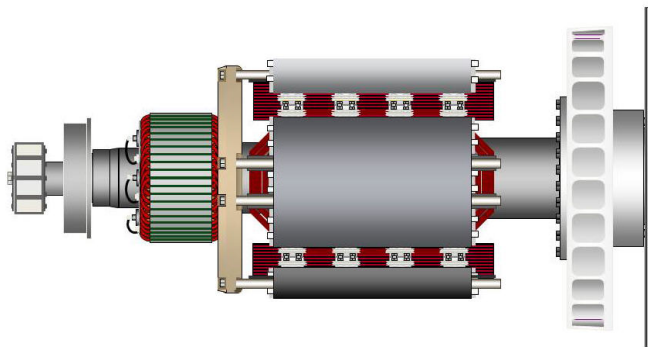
ONE BEARING ALTERNATOR ROTOR SHOWING COUPLING DISCS BOLTED TO DRIVE END COUPLING HUB (AT RIGHT)
